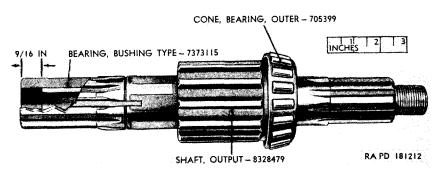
Bushing type pilot bearing installed in transfer rear axle output shaft.
